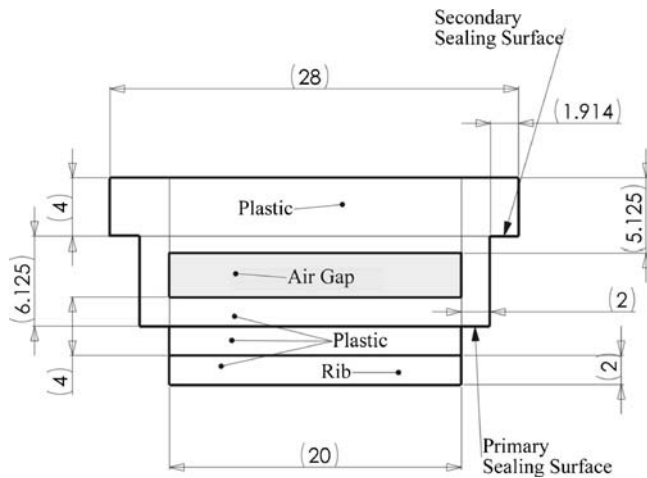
End view of straight section instrumented plug. Dimensions are in millimeters.
